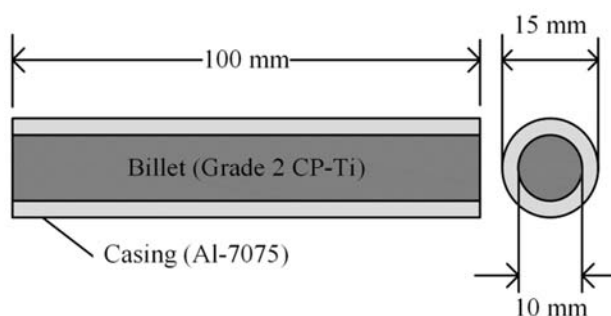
Schematic illustration and dimensions of the bimetallic rod specimen for ECAP.
